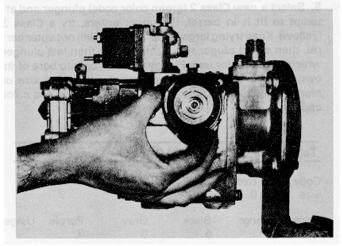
G-18. Removing AFC Bellows and Piston Assembly
